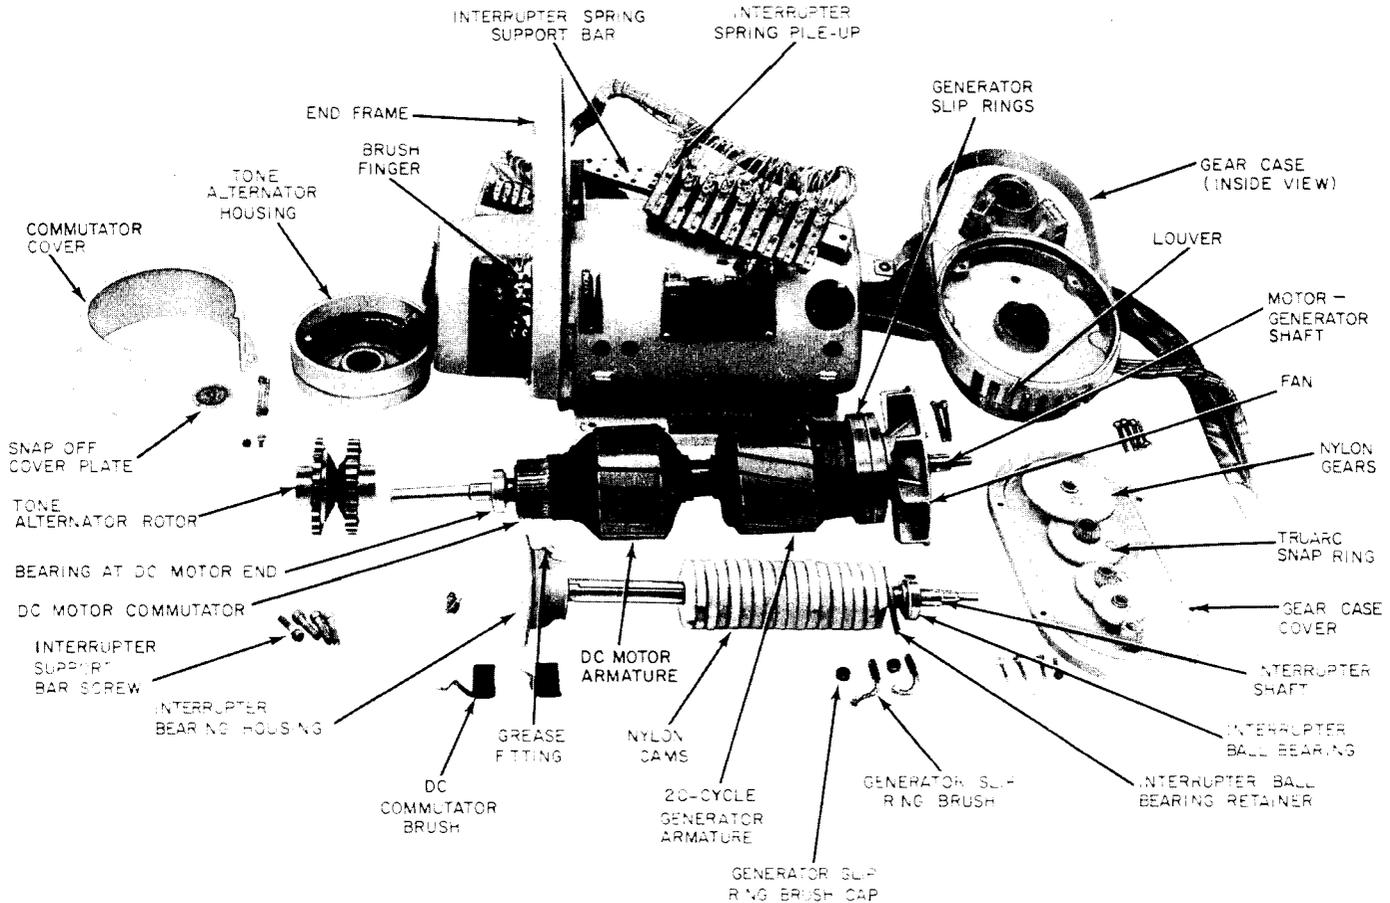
DC Motor-Driven Ringing Machine—Detailed Disassembly—Tech Systems Company (formerly Electric Specialty Company)
